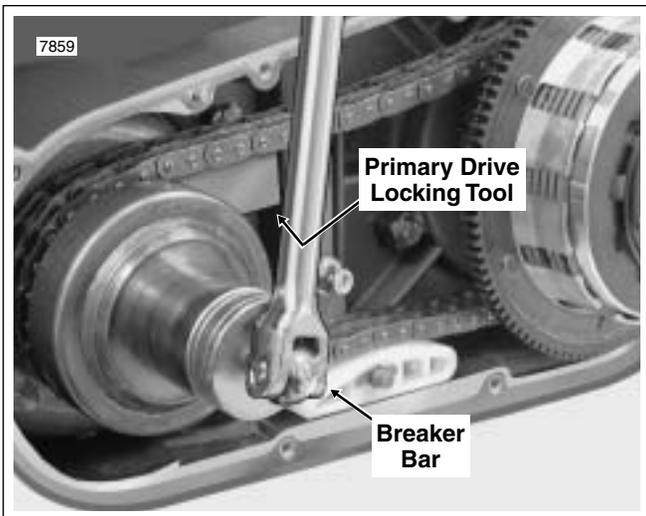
Place Primary Drive Locking Tool and Loosen Engine Compensating Sprocket Nut
